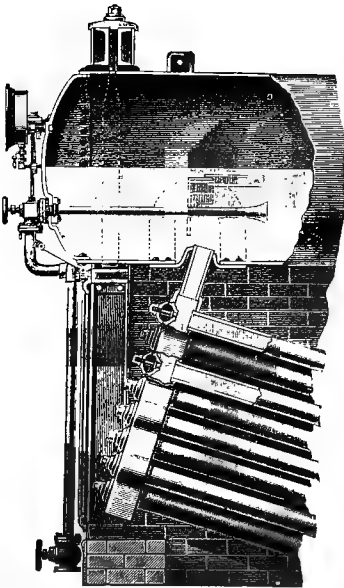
Babcock & Wilcox boiler. Section of upper part of front end.
